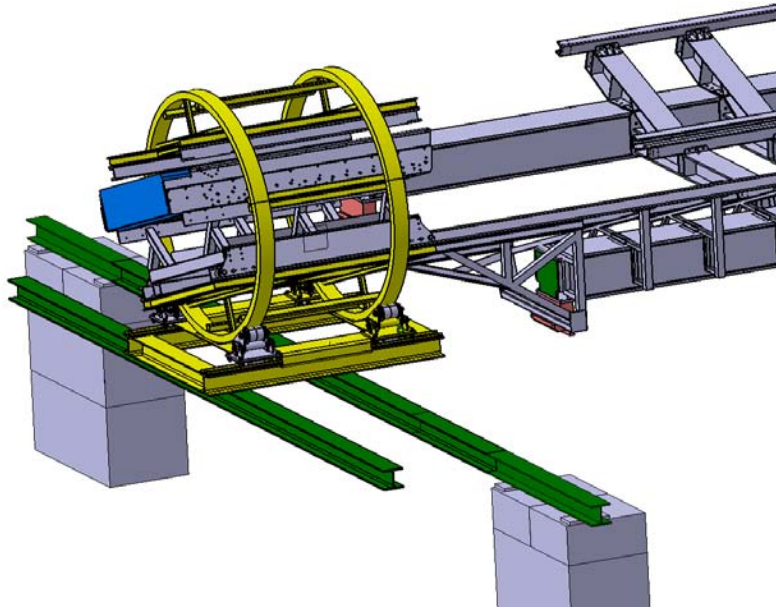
A C-Side DCal super module is positioned in the installation tool mounted on an elevated chariot. A custom bridge piece connects the extruded aluminum rails on the A-Side cradle to corresponding rail pieces on the installation tool.
